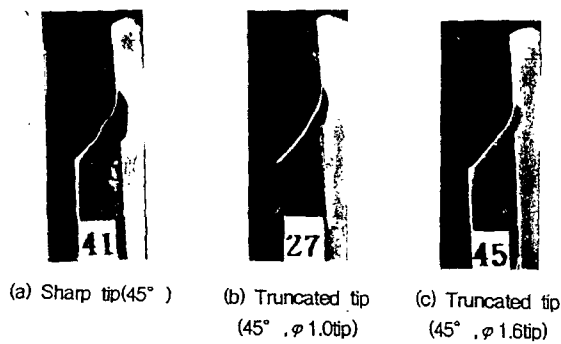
Characteristics of fillet welded section by various electrode shape
